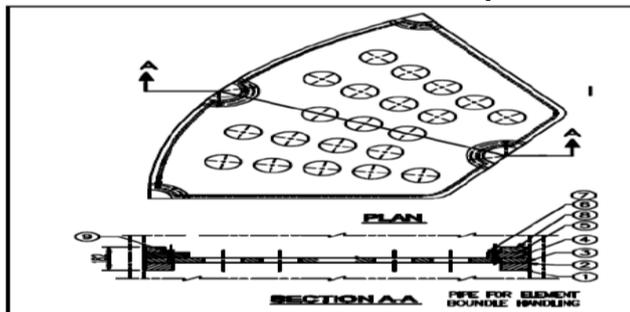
Detail Drawing of Filter Sheet Plate Assembly
